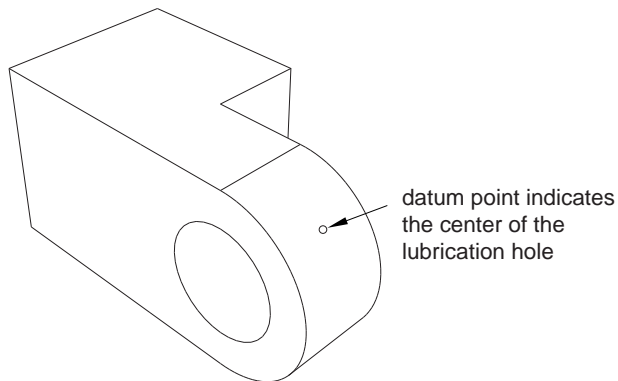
A datum point indicates the center of the lubrication hole.
